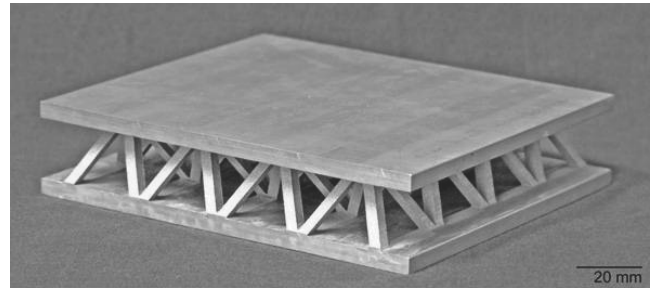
Skeleton construction manufactured with casting and electro-erosion techniques [10]
